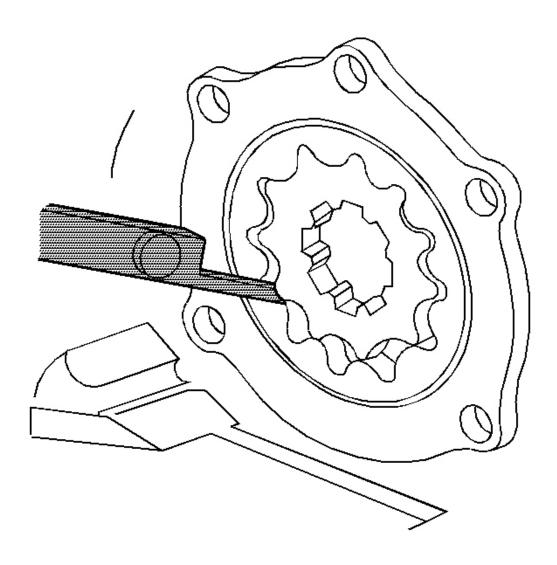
Measuring Inner Oil Pump Gear Tip Clearance Courtesy of GENERAL MOTORS CORP.
